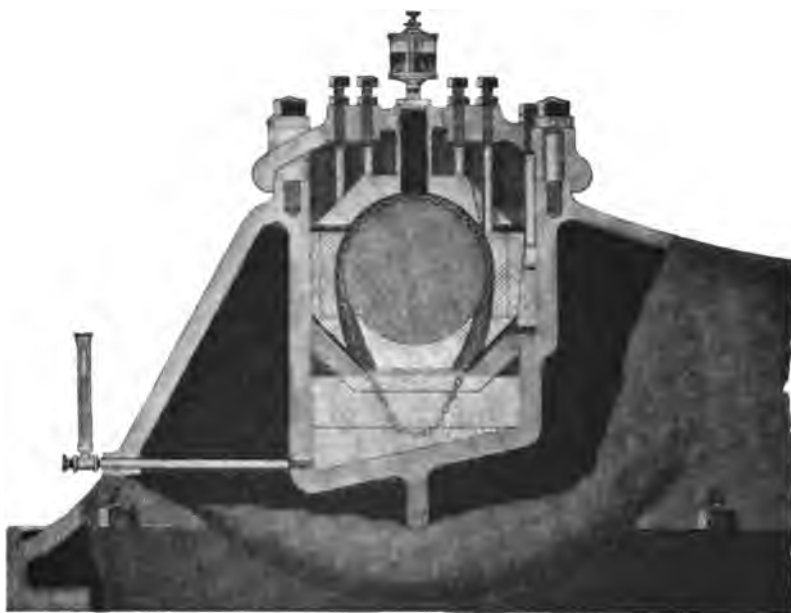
Main bearing, showing oil cellar (cross-section)
